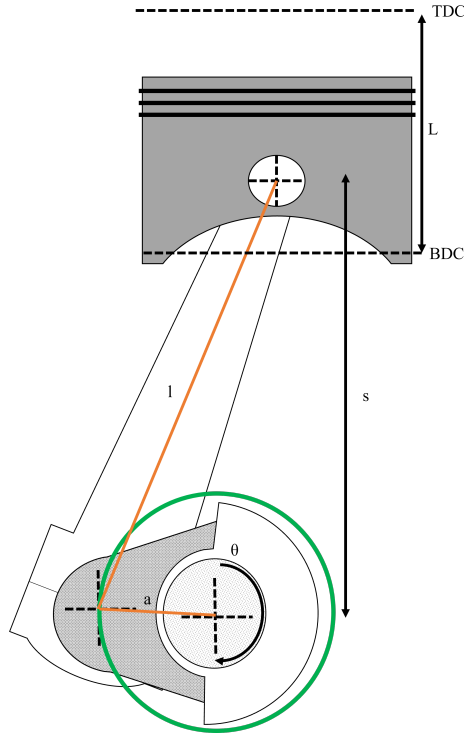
Geometry of the cylinder, piston, connecting rod and crankshaft.
